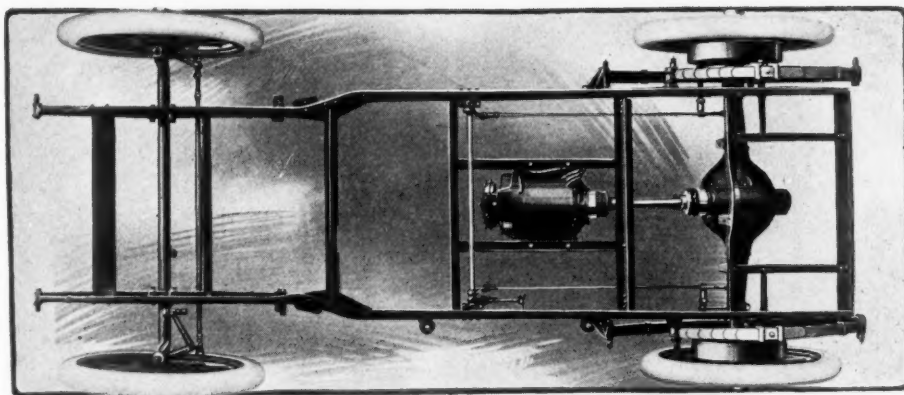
Plan view of the new Rauch & Lang electric chassis
